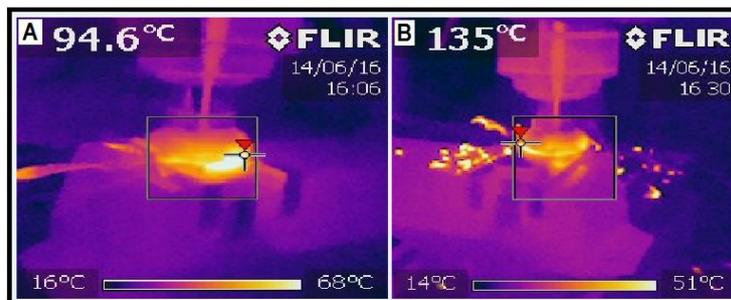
Temperature during milling operation a) down-milling movement; b) up-milling movement.
